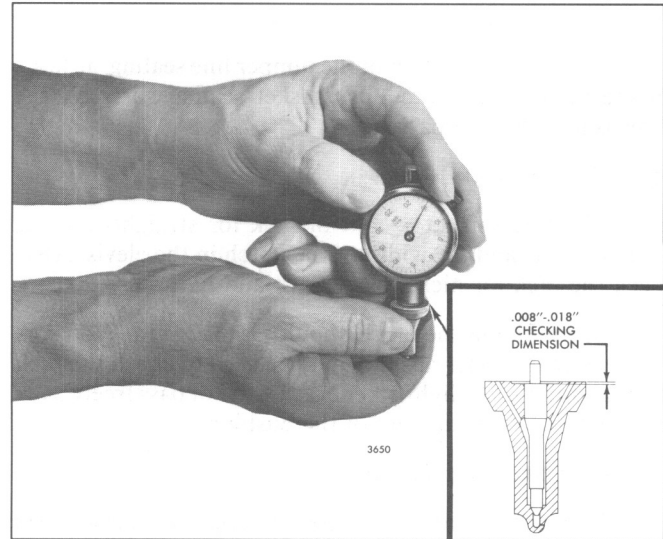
Checking Needle Valve Lift with Tool J 9462-02
